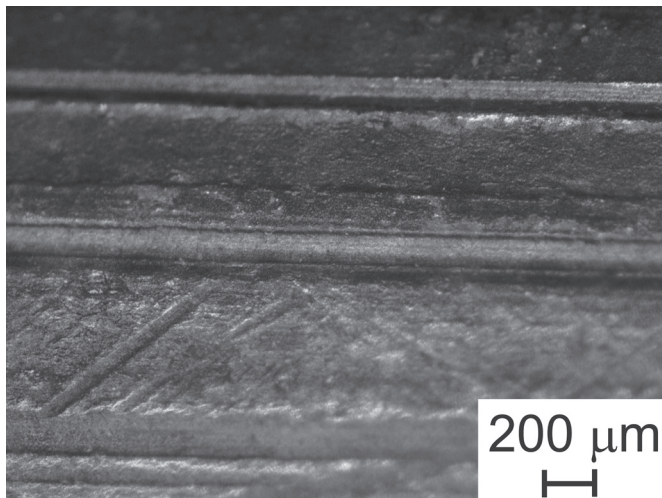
The surface of 16.5 mm-diameter 20MnB4 steel wire rod with visible longitudinal cracks – magnification 45 x.
